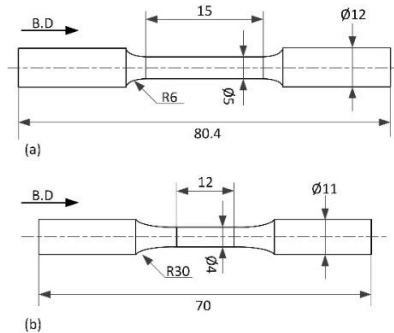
The geometry of the bulk L-PBF samples used for tensile (a) and fatigue (b) tests (dimension in mm).
